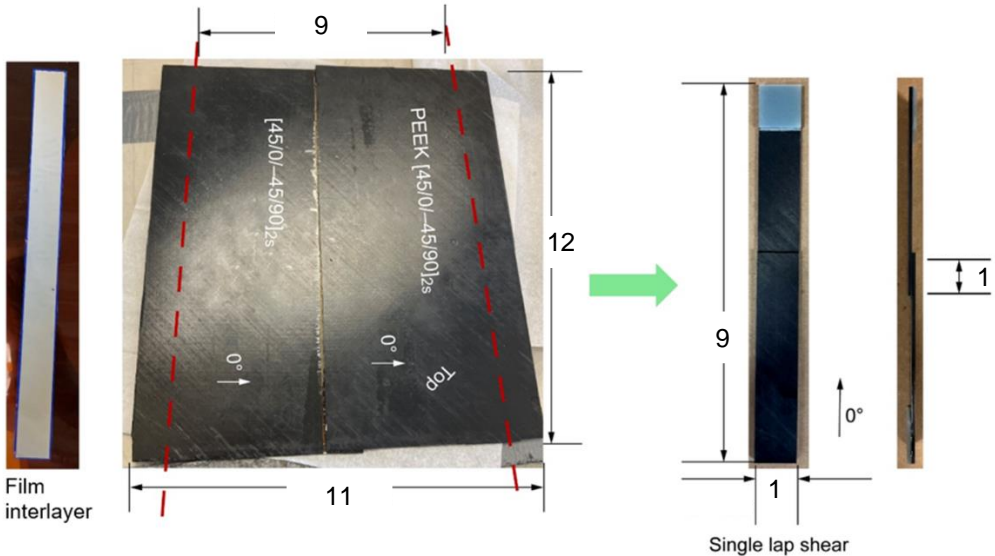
AS4/PEEK QI panel joined using a LM-PAEK film interlayer using a hot press. The panel was machined into 10 SLS coupons for mechanical testing and re-assembly trials. Dimensions in inches.
